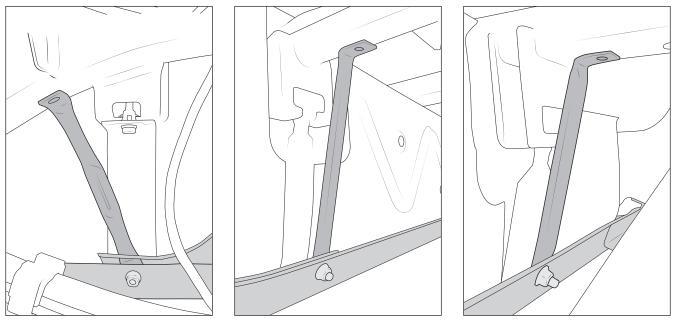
Outboard/Rear (left) Inboard/Rear (center) Inboard/Front (right)
